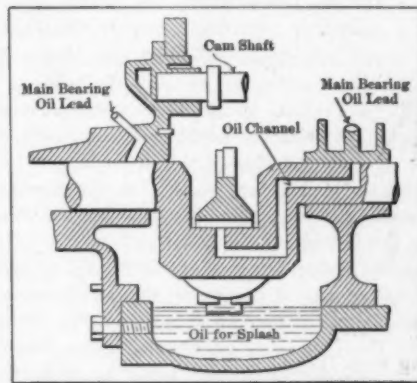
Showing the troughs for splash and the method of oil supply to main and crankshaft bearings in Franklin motor
